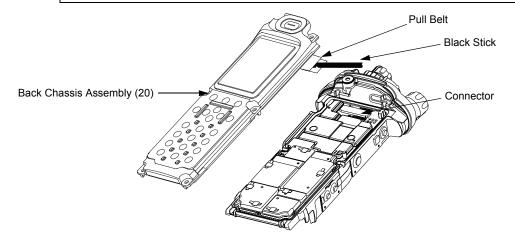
Remove Back Chassis Assembly from Main Chassis Assembly
